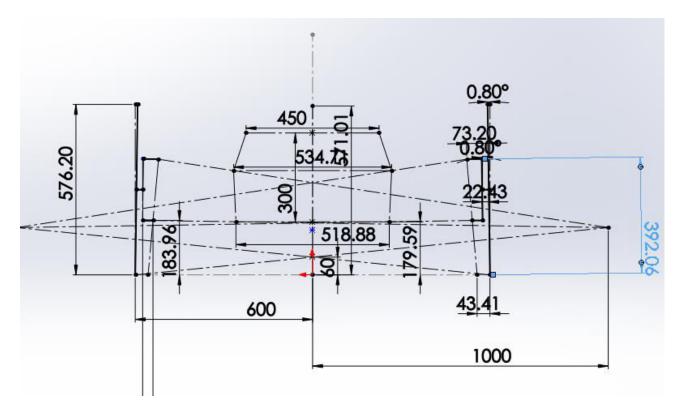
Dimensioning of rear wheel assembly on Solidworks
